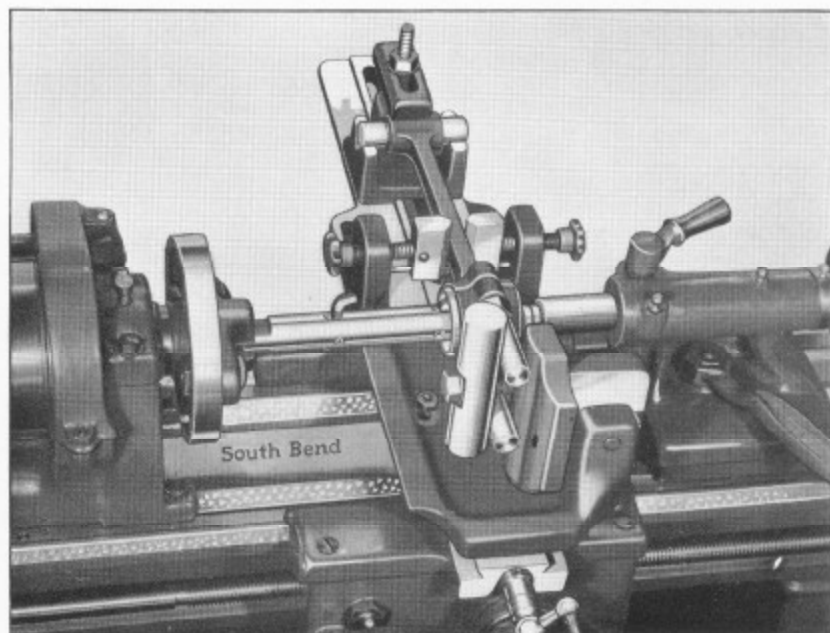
Boring a re-babbitted connecting rod in the lathe.
